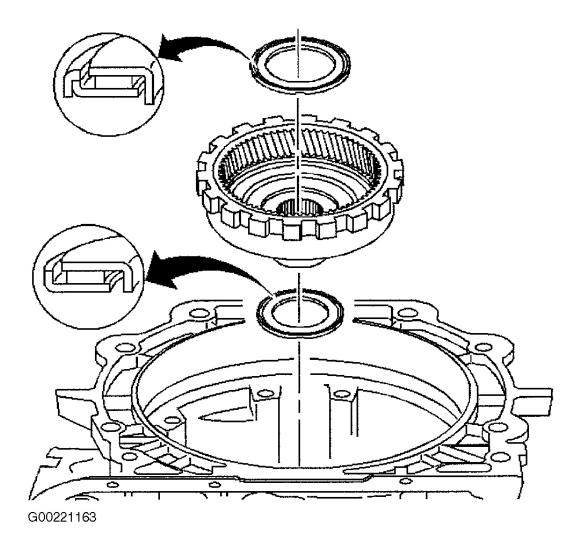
Removing/Installing Internal Reaction Gear & Thrust Bearing
